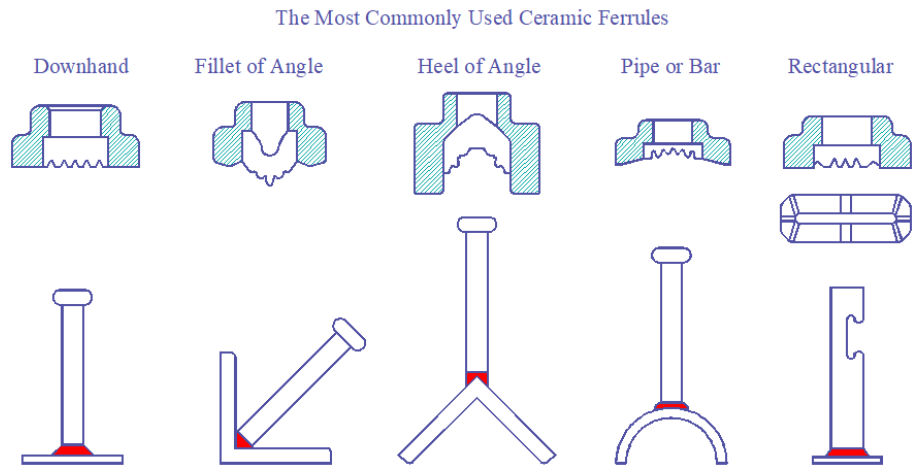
Ferrule Varieties Based on Welding Method and Shape (Olson et al., 1993).
